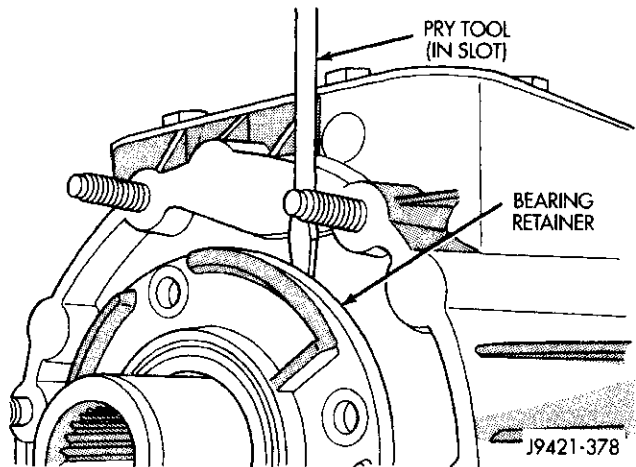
Loosening Bearing Retainer (Breaking Sealer Bead)
